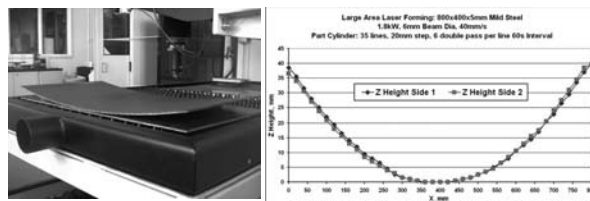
800x400x5 mm mild steel sheet formed into a part-cylinder and height measurements along the two longer axis edges
